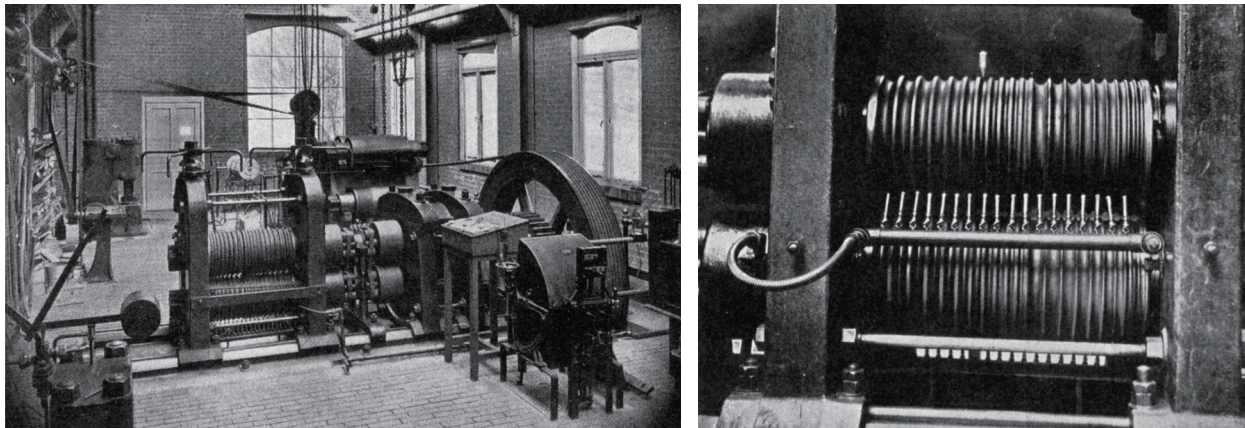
Rod Rolling Mill (Grooved Rolling Mill) Used at NPL; Preheating Rolls with Gas Burner (Right)²⁵
